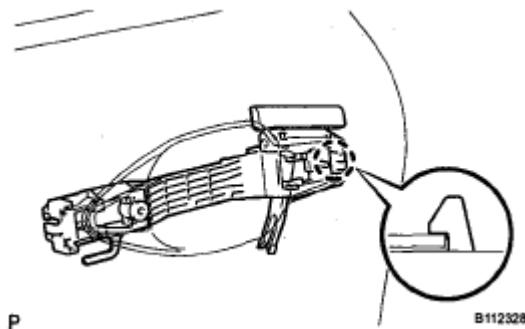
Identifying Front Door Outside Handle Frame Sub-Assembly Claw
